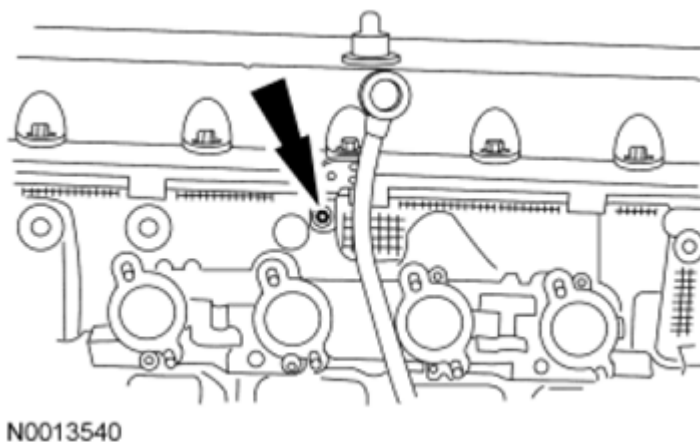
Identifying RH Exhaust Manifold, Nut And Gasket
